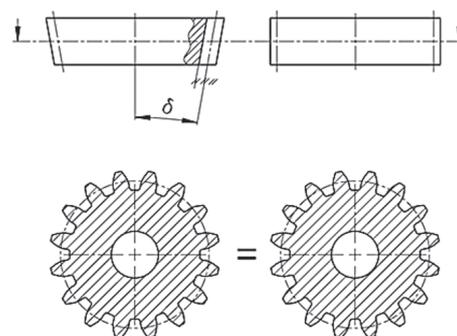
Comparison of Beveliod gear geometry with a spur gear
